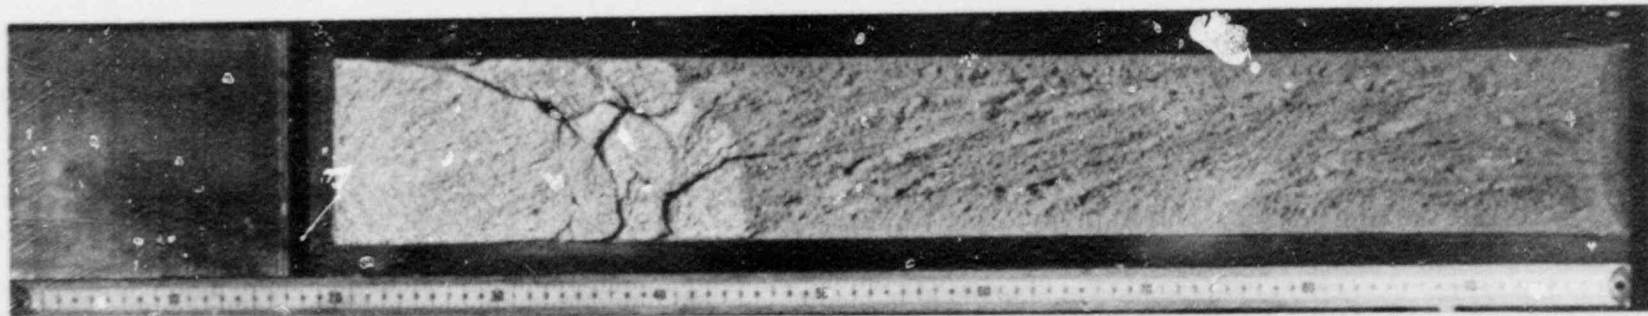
Overall fracture surface of test specimen WP-2.3.
